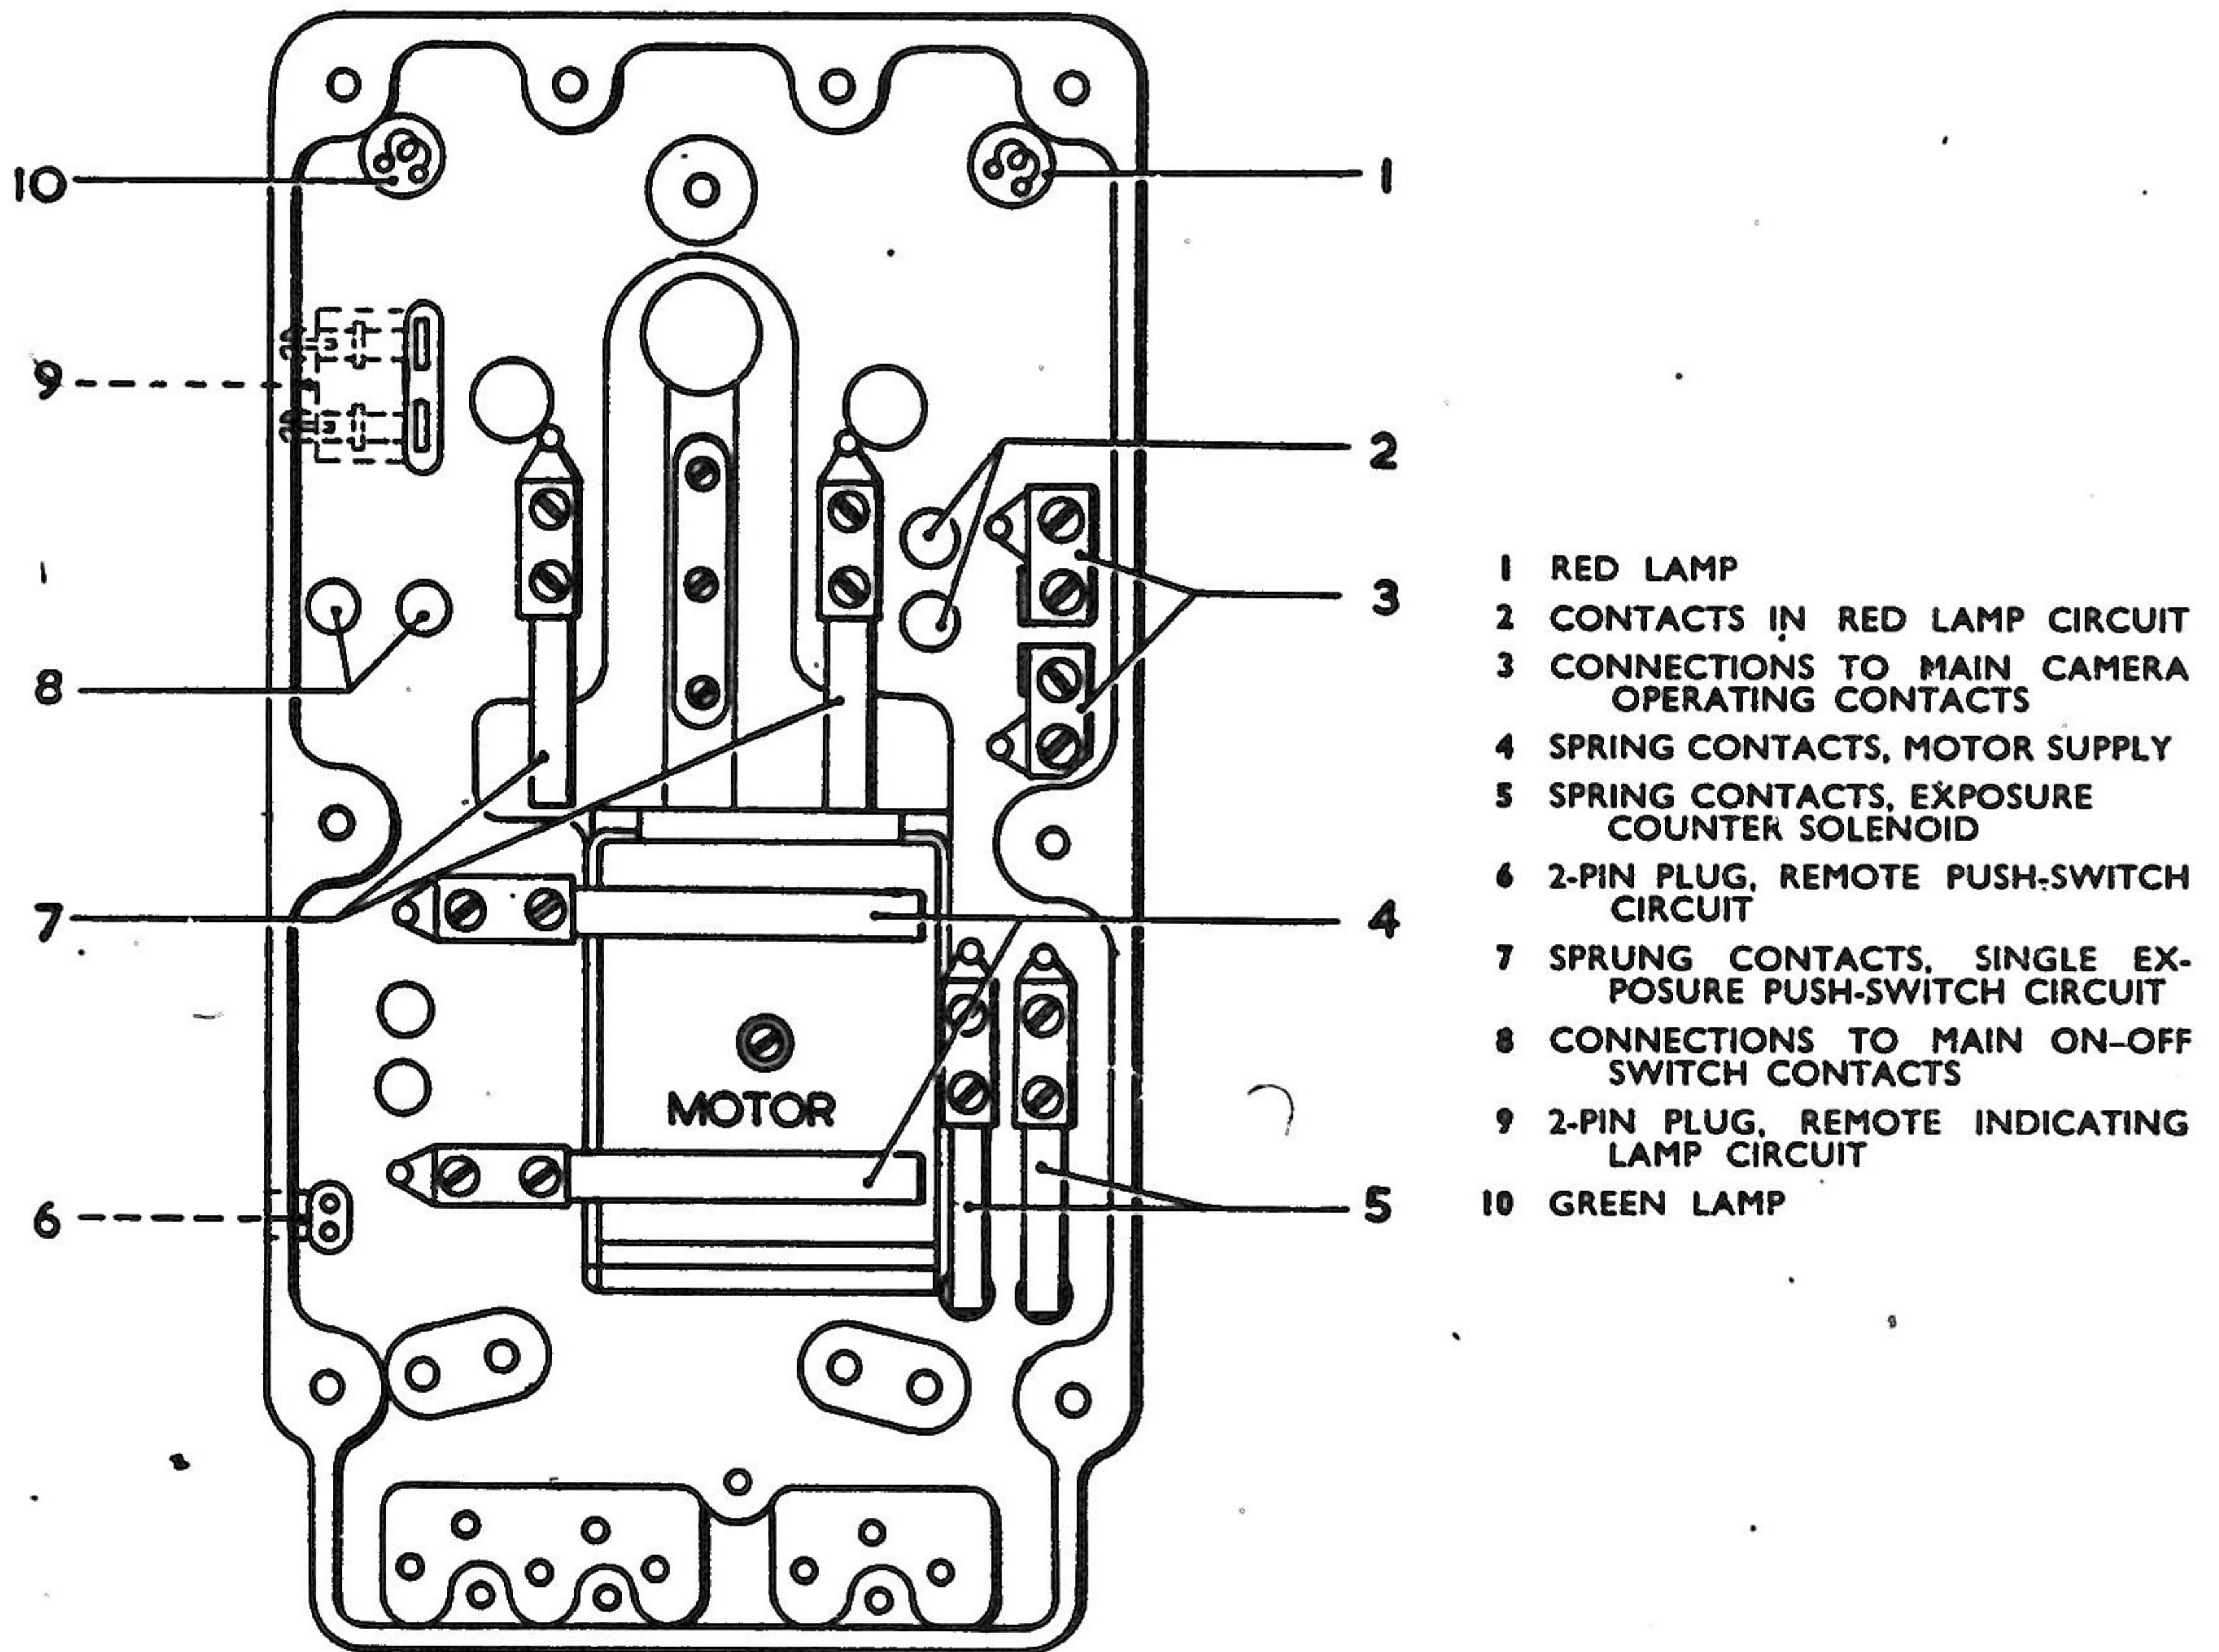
Camera control, Type 35, backplate removed showing connecting points for wiring
